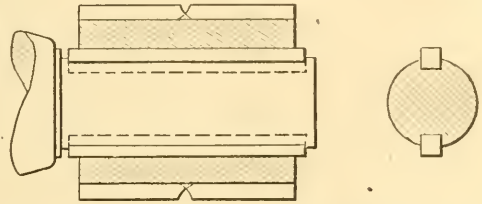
AN IMPROVED METHOD OF KEYING FOR GEARS.
